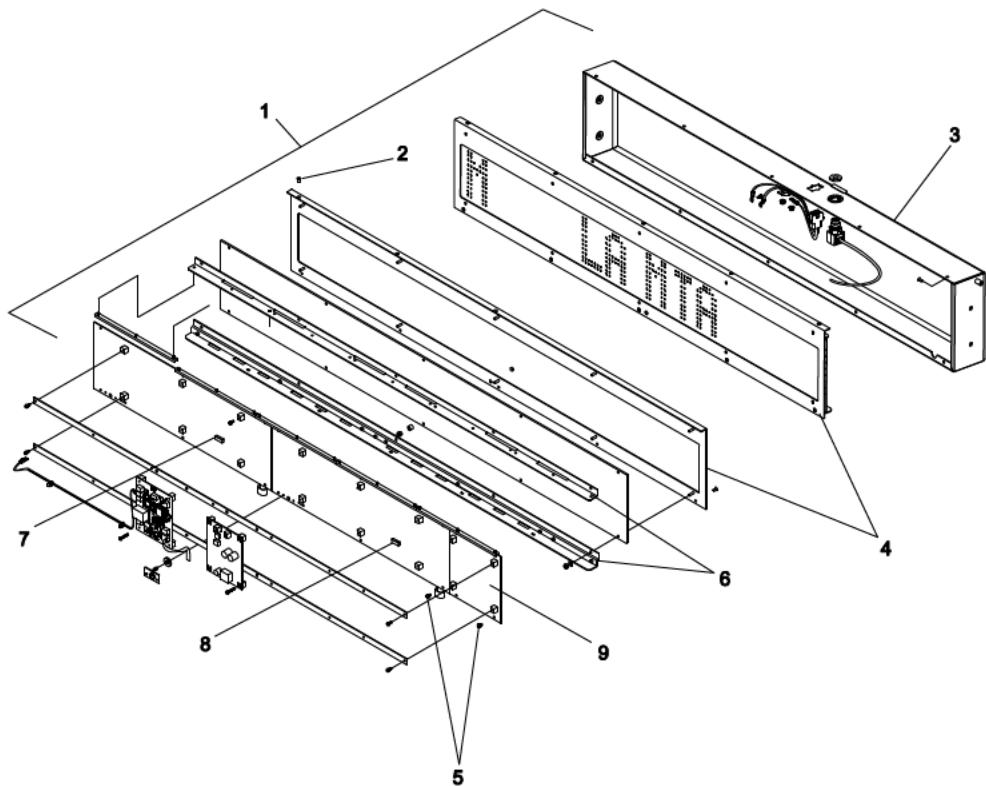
Replace Side Destination Sign LED Display Matrix PCB
